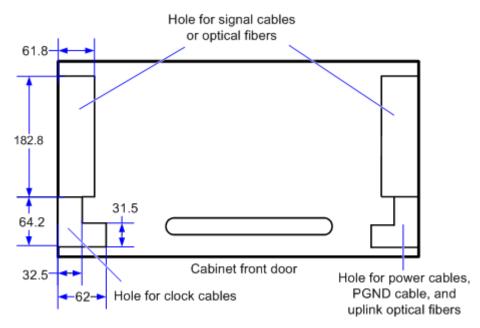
Cable holes at the bottom of the cabinet (top view)
